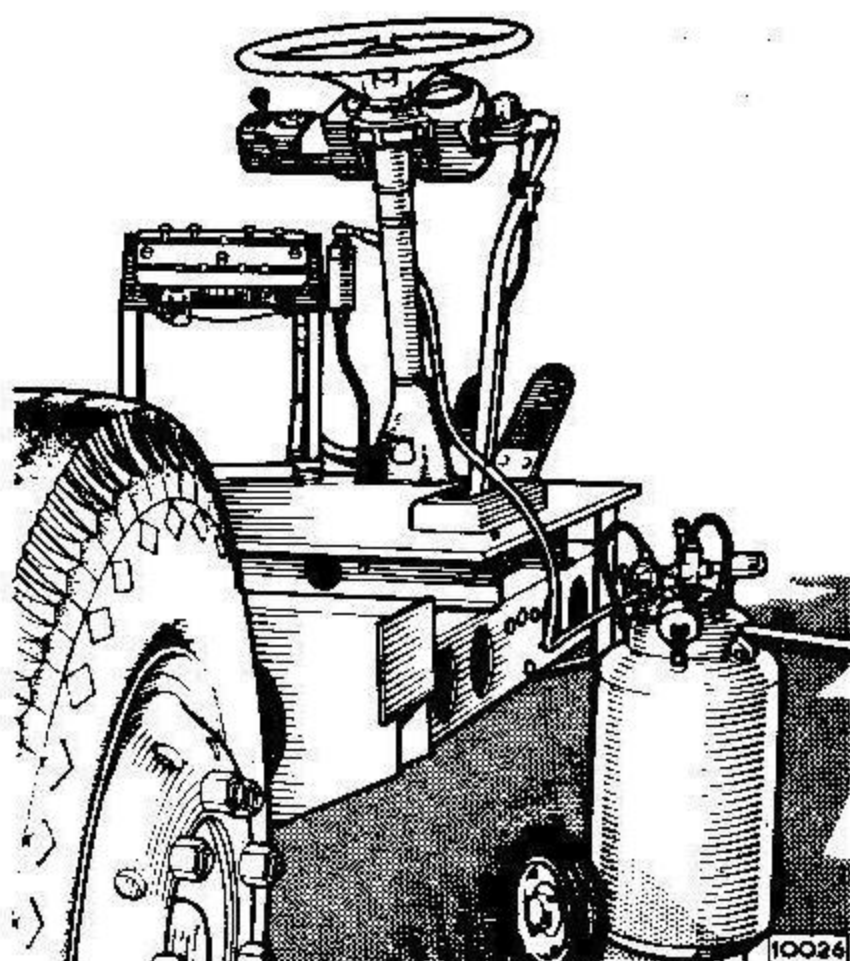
Utilizing pressure operated equipment when bleeding the accelerator control line
